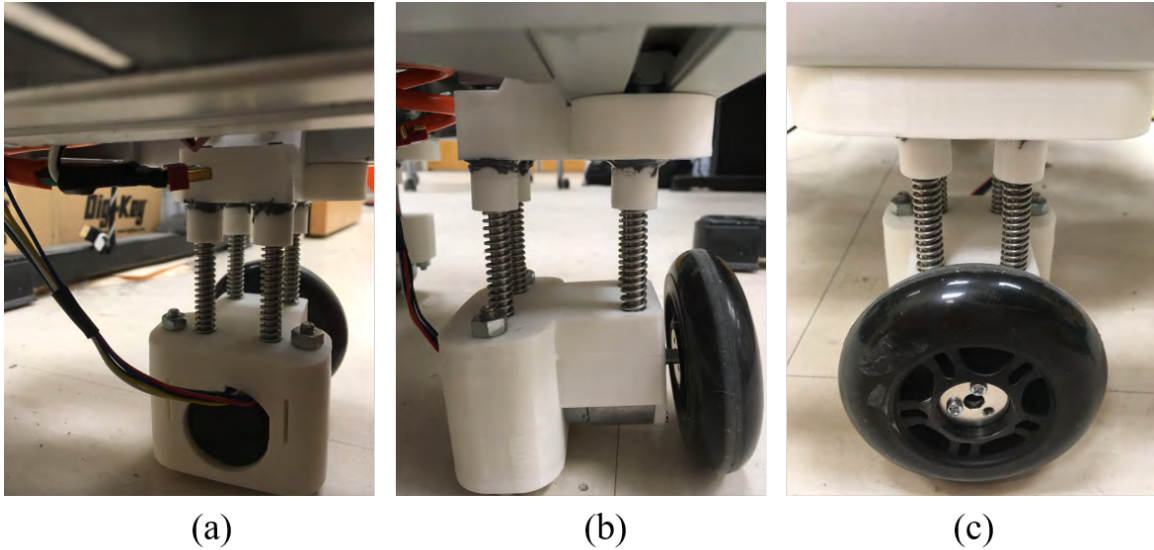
(a) Side view (under frame) of the shock assembly for one differential drive motor. (b) In-line view of the drive motor shock assembly. (c) Side view (outside frame) of the shock assembly for the drive motor.
